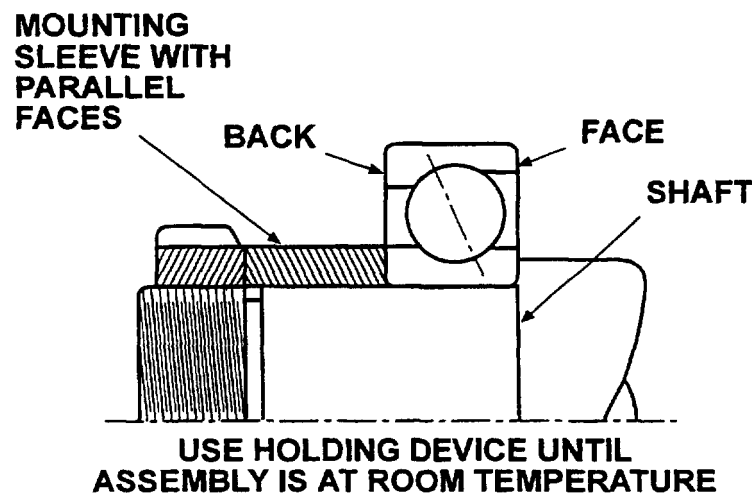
Mounting of Duplex Bearing (DB Mount Shown)
